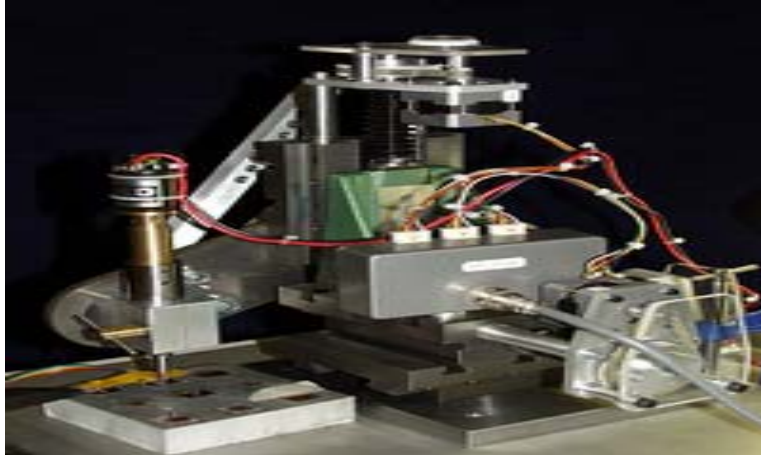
Residual stress measurement equipment using Hole drilling method
